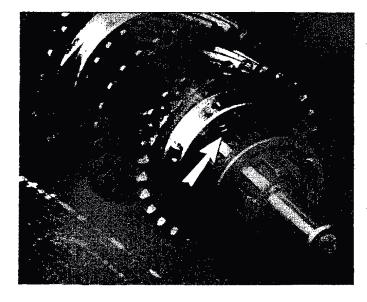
The arrow indicates the third speed thrust washer and locating peg. Note the hole in the gear cone
